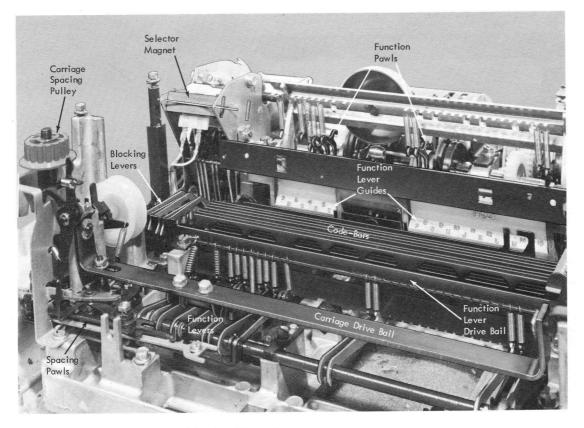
Typing Unit (Platen and Carriage Removed)
